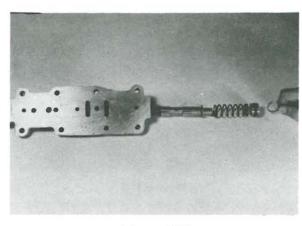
Install the valve stop, centering spring, regulating spool, spacer and sleeve. Install retainer ring.
